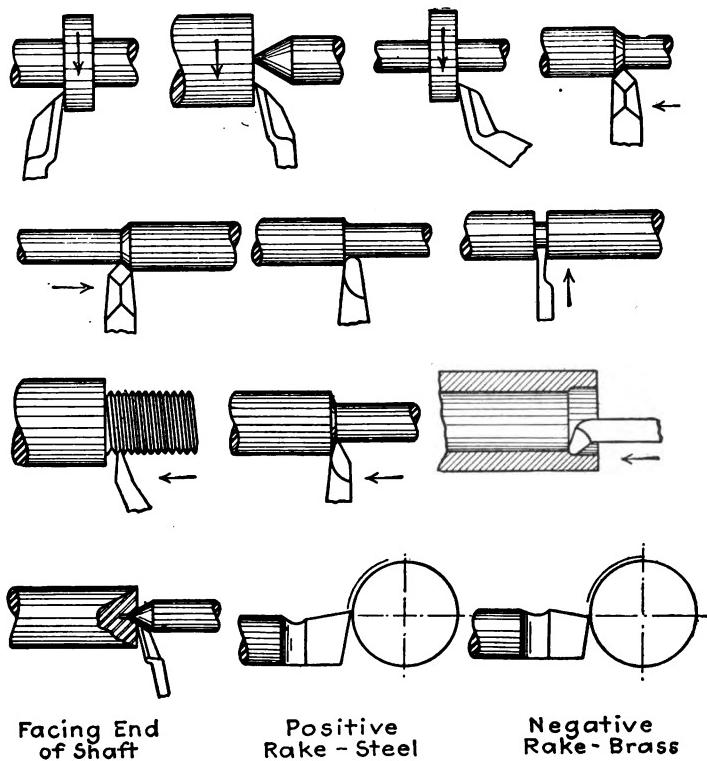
Illustrating the use of the different lathe tools shown in Fig. 176
